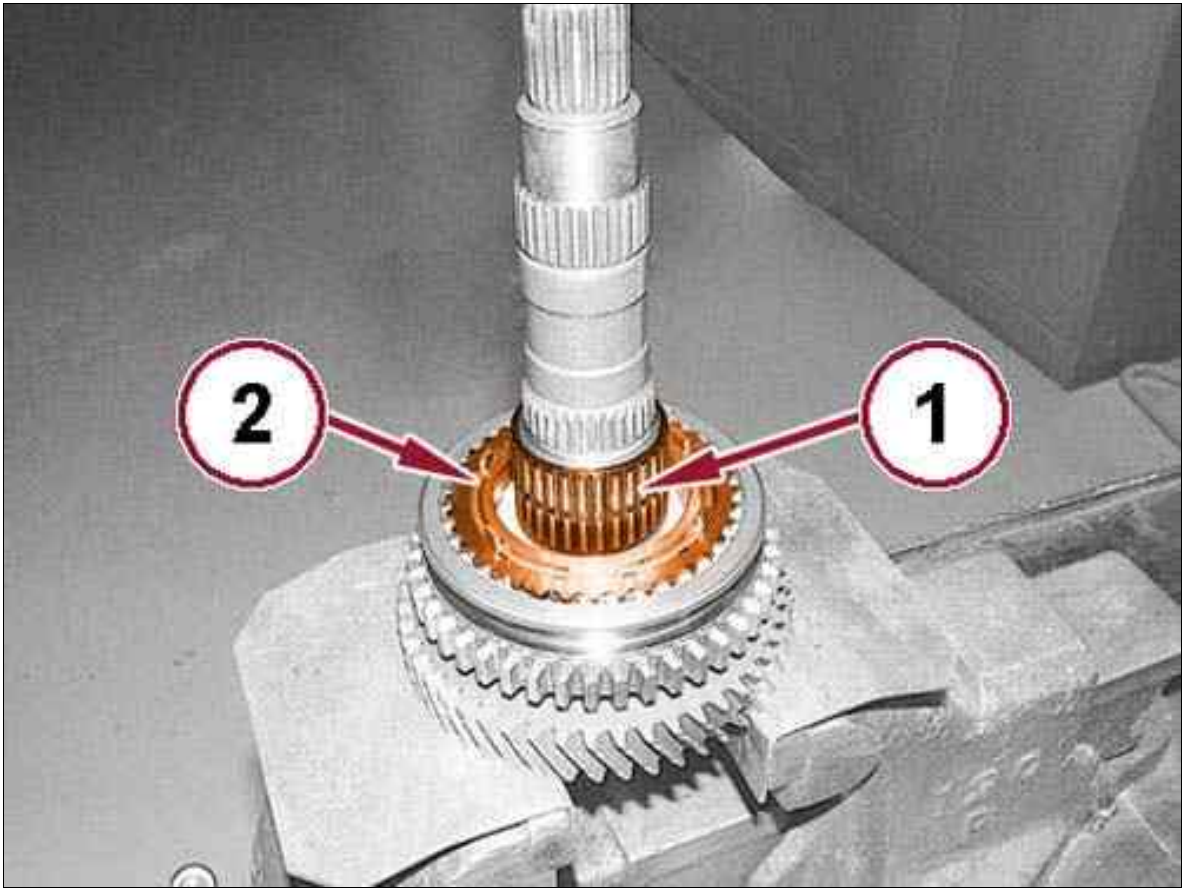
3rd Gear Driven Gear, 2nd Gear Driven Gear & Special Tool
